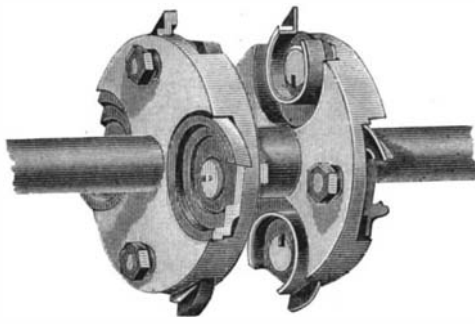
HEADS FOR BOX BOARD MATCHING.
